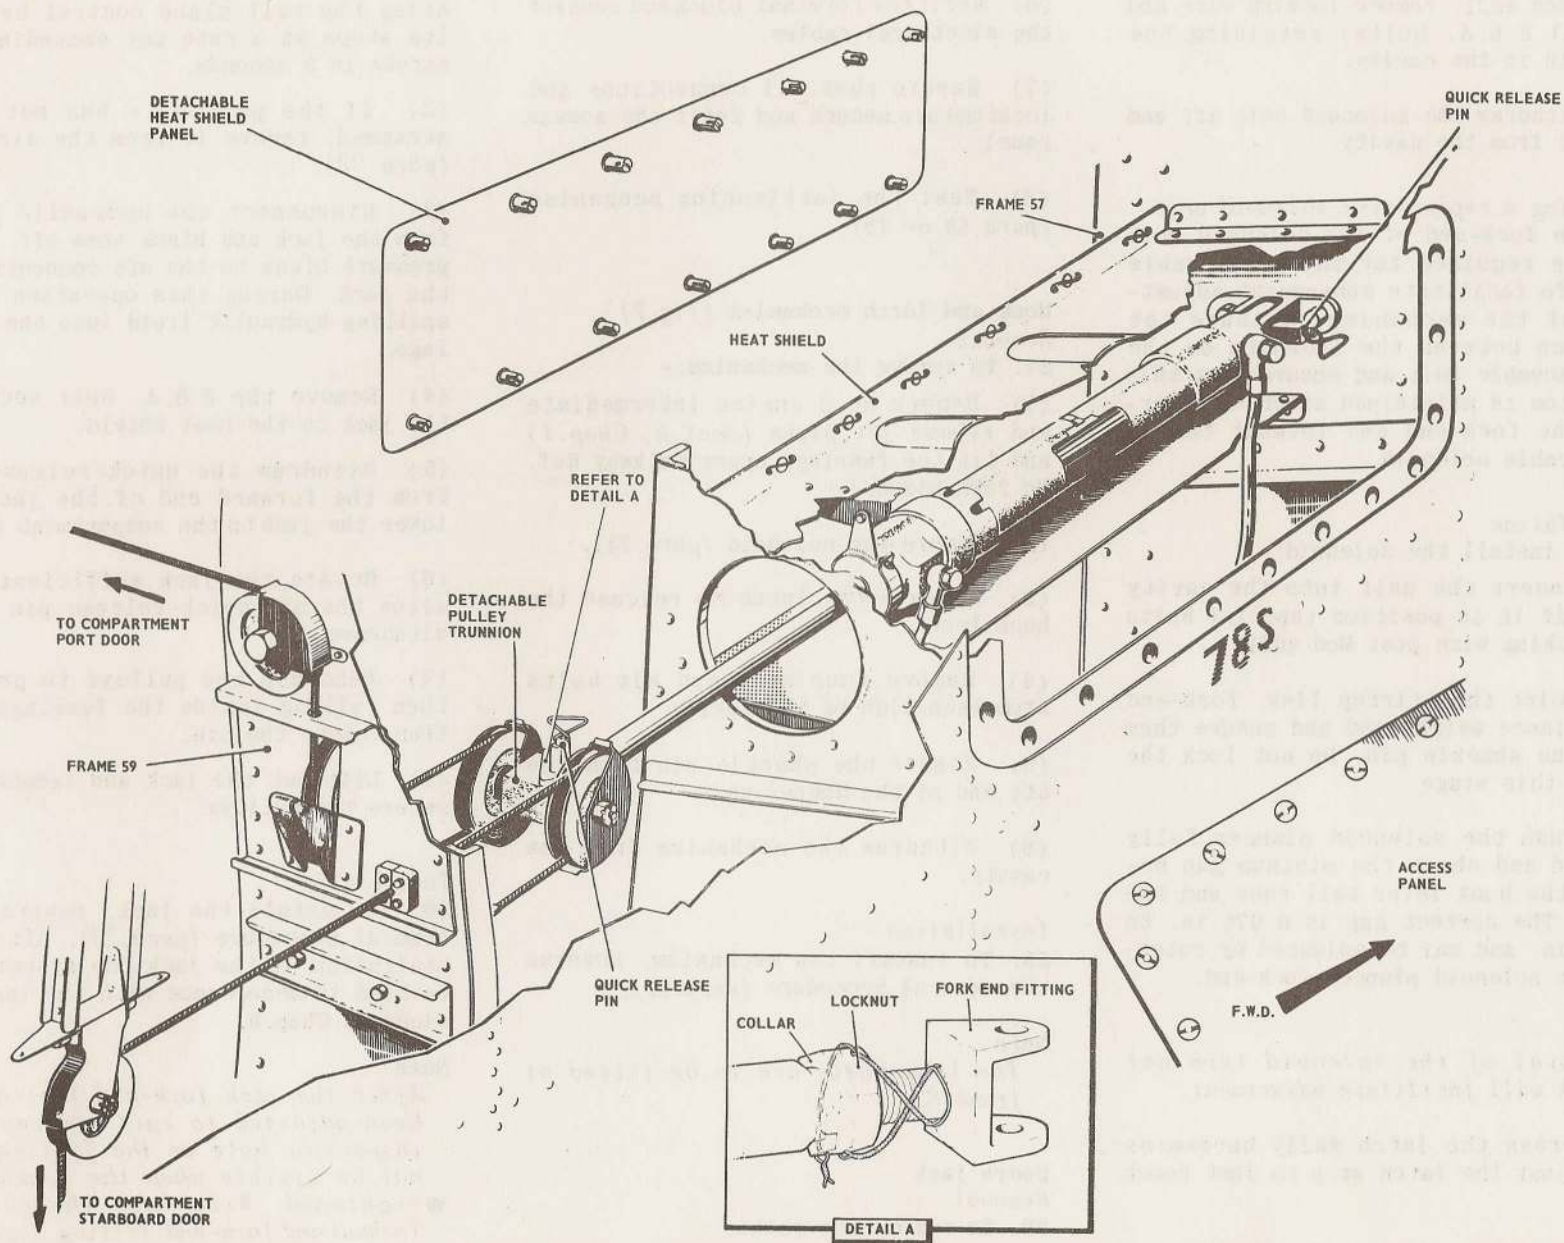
DOORS JACK - REMOVAL AND ASSEMBLY
